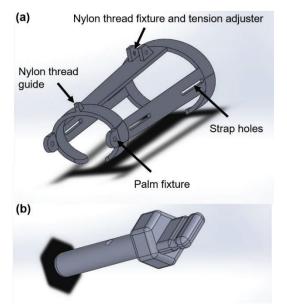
CAD design of (a) hand socket and (b) hexagonal tension adjuster
